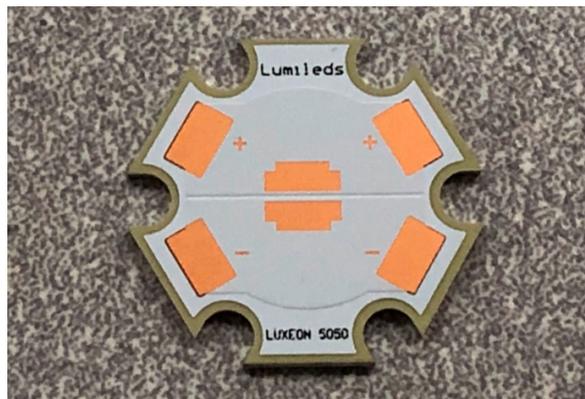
An example of a LUXEON 5050 (Round LES) star board showing the LED electrode pad solder mask openings.
